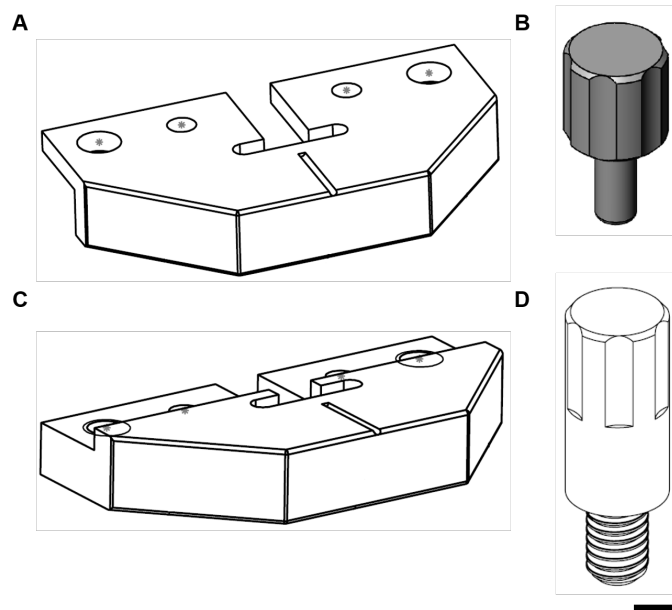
CAD drawing of the components of the tethered mould. CAD drawings of four main components of the distraction mould: top piece (A), bottom piece (B), dowel (C), and screw (D). Scale bar represents 2 mm.
